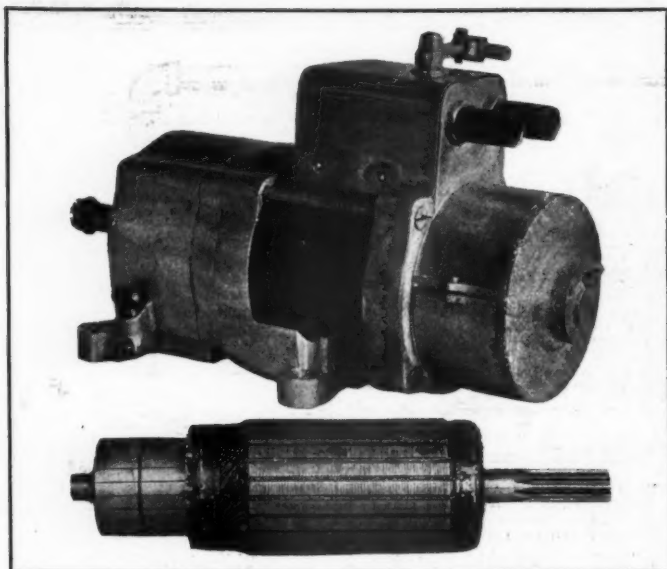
Jesco starter assembly. Fig. 6—Armature
